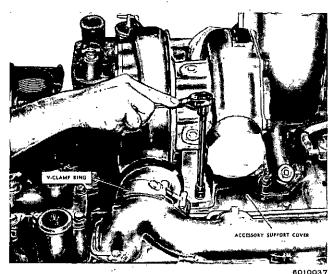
Removing turbocharger – VT8-430 mounting capscrews
